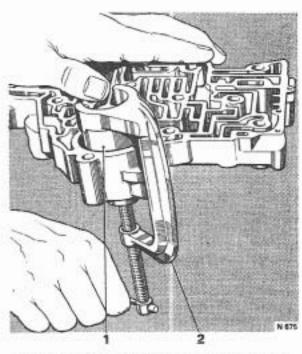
FITTING THE ACCUMULATOR AND SPRING
